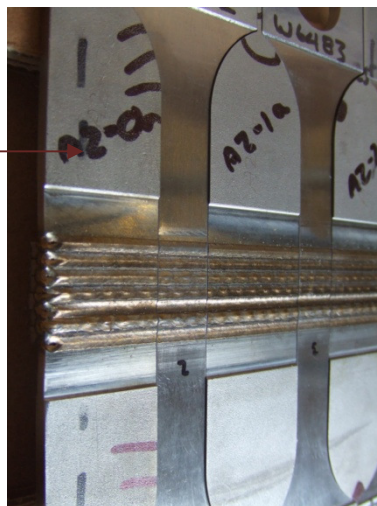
Plates with gauge length smoothed for the specimens. The weld was kept unsmoothed for a few tensile tests.
